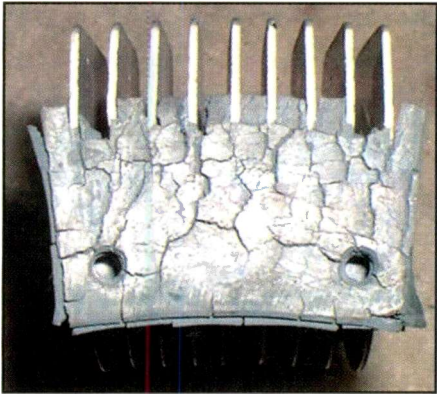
Photo C. This shows an end view of one of the worst stator plate block assemblies. The aluminum plates were cast in pot metal. Notice how the metal has fissured and distorted!
